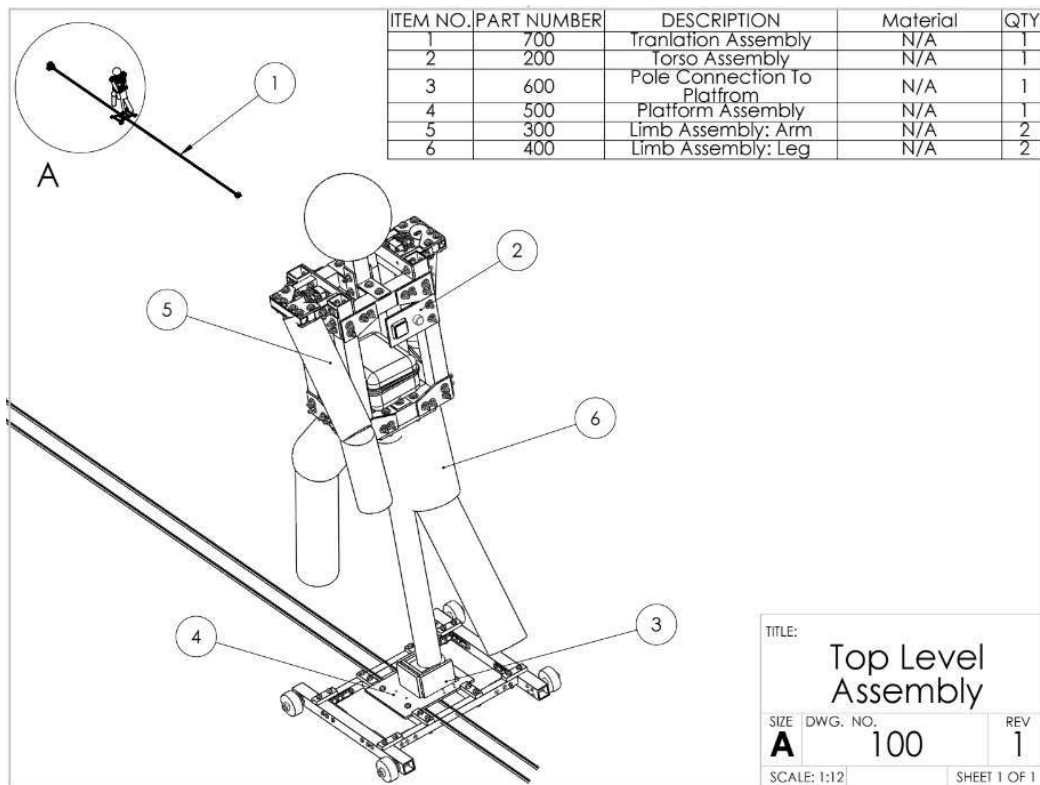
Top Level Assembly Drawing of the Pedestrian Target (Original design, prior to changing the direction of the platform and moving the control panel)
